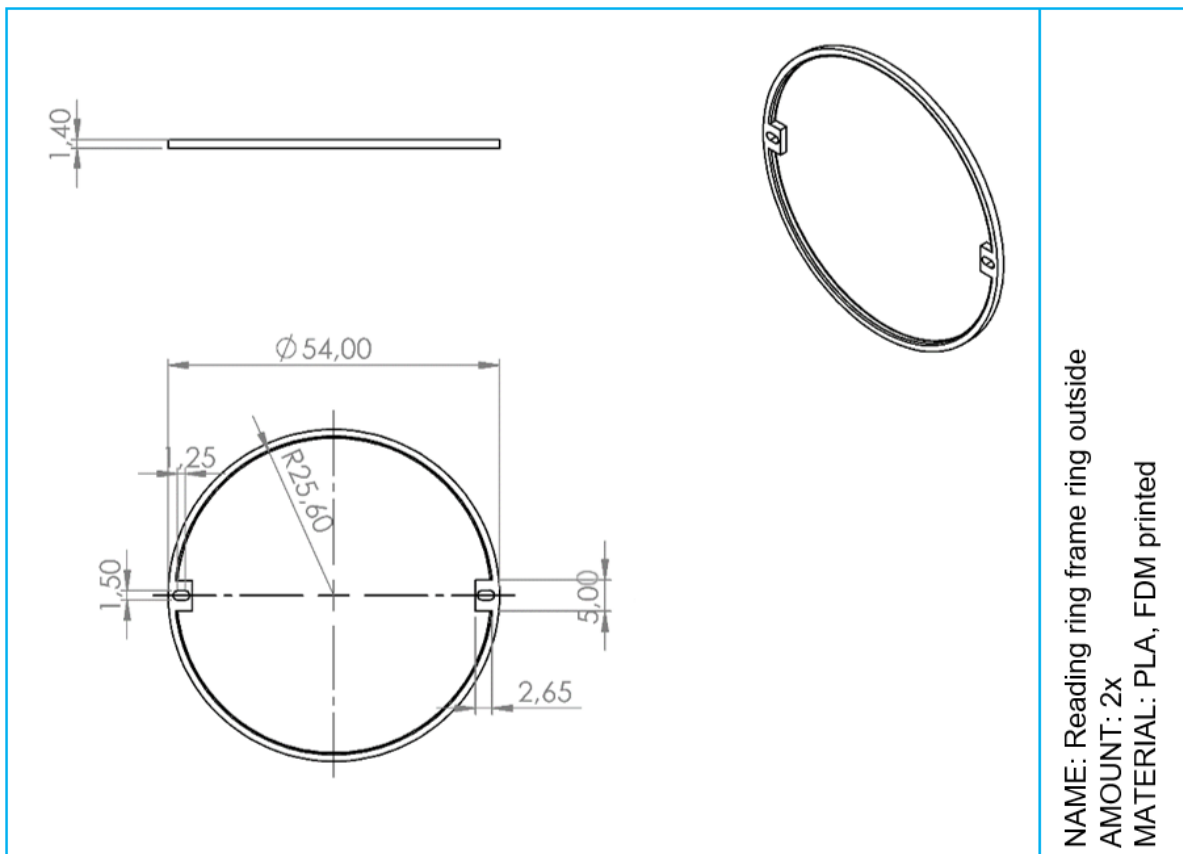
Construction drawings of the reading ring frame outside rings - 3D Printed prototype
